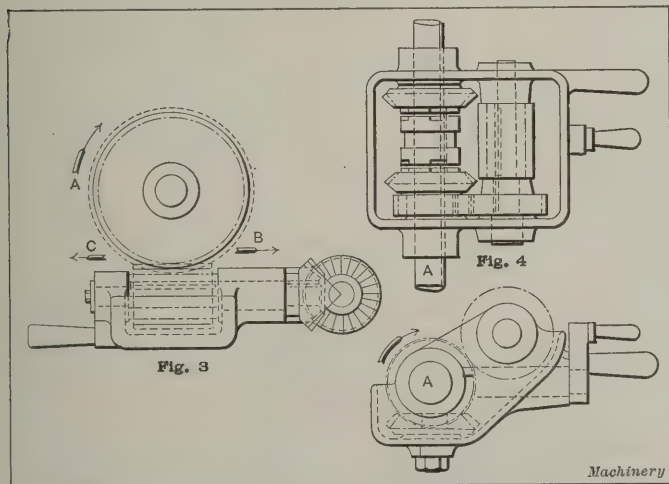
Direction of Thrusts in Worm and Worm-wheel Design. Fig. 4. Worm-box with Reversing Mechanism.
